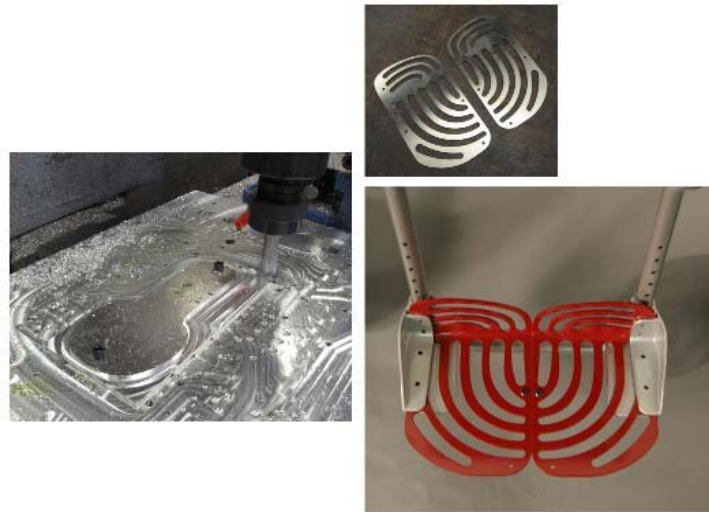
CNC manufacturing, cut part prior to bending and final product after finishing and powder coating
